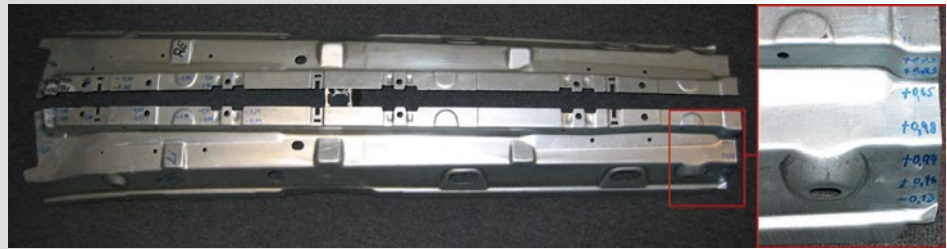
There are no current CAD data for the calibration tool of the roof frame. Nevertheless, some modifications are to be milled into the tool using CAD/CAM (see markings on the finished metal sheet, detailed view right figure).
